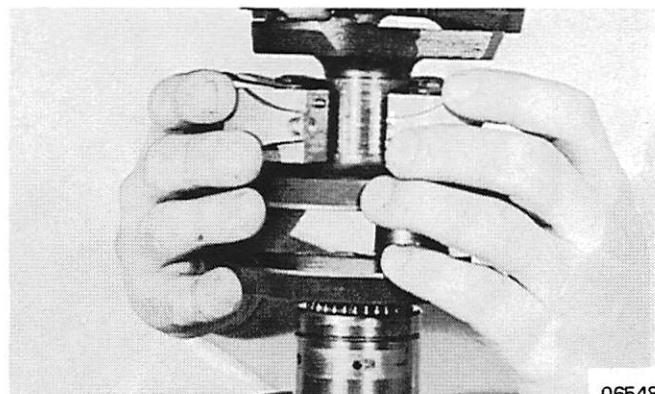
Removing and Installing Center Main Bearing Reed Cage
